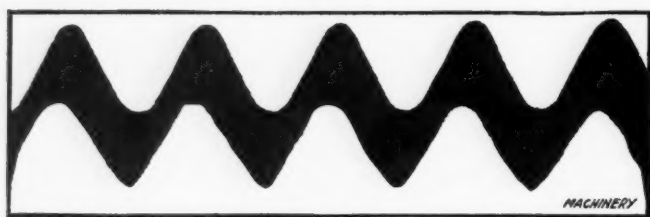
Comparison of a Screw Thread (Below) and a carefully drawn Screw Thread Outline
